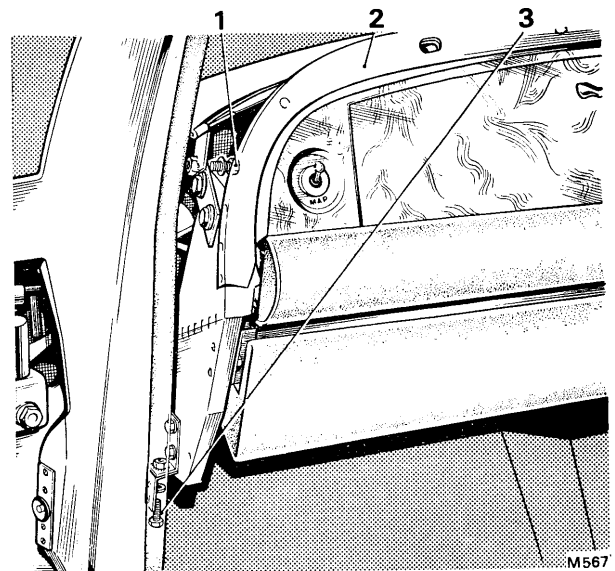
POSITION OF THE SETSCREWS SECURING LEFT-HAND SIDE OF THE INSTRUMENT BOARD
